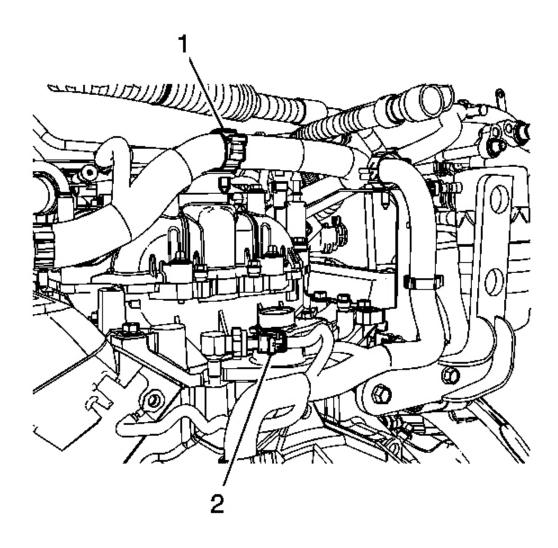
Oil Pressure Sensor Electrical Connector & Clamp Courtesy of GENERAL MOTORS CORP.
